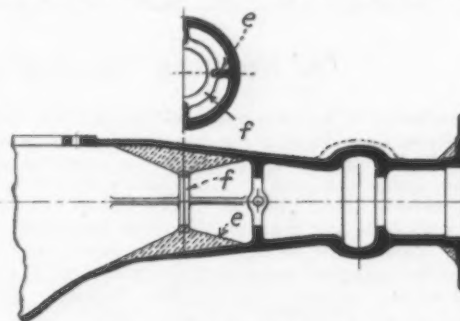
Where Extra Metal Was Added to Overcome Cracks and Defects
